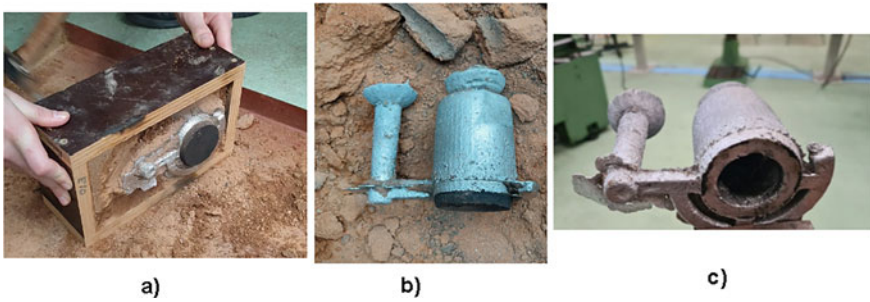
Result of casting process a into the frame mold, b with the core, c the casting result without sand core
